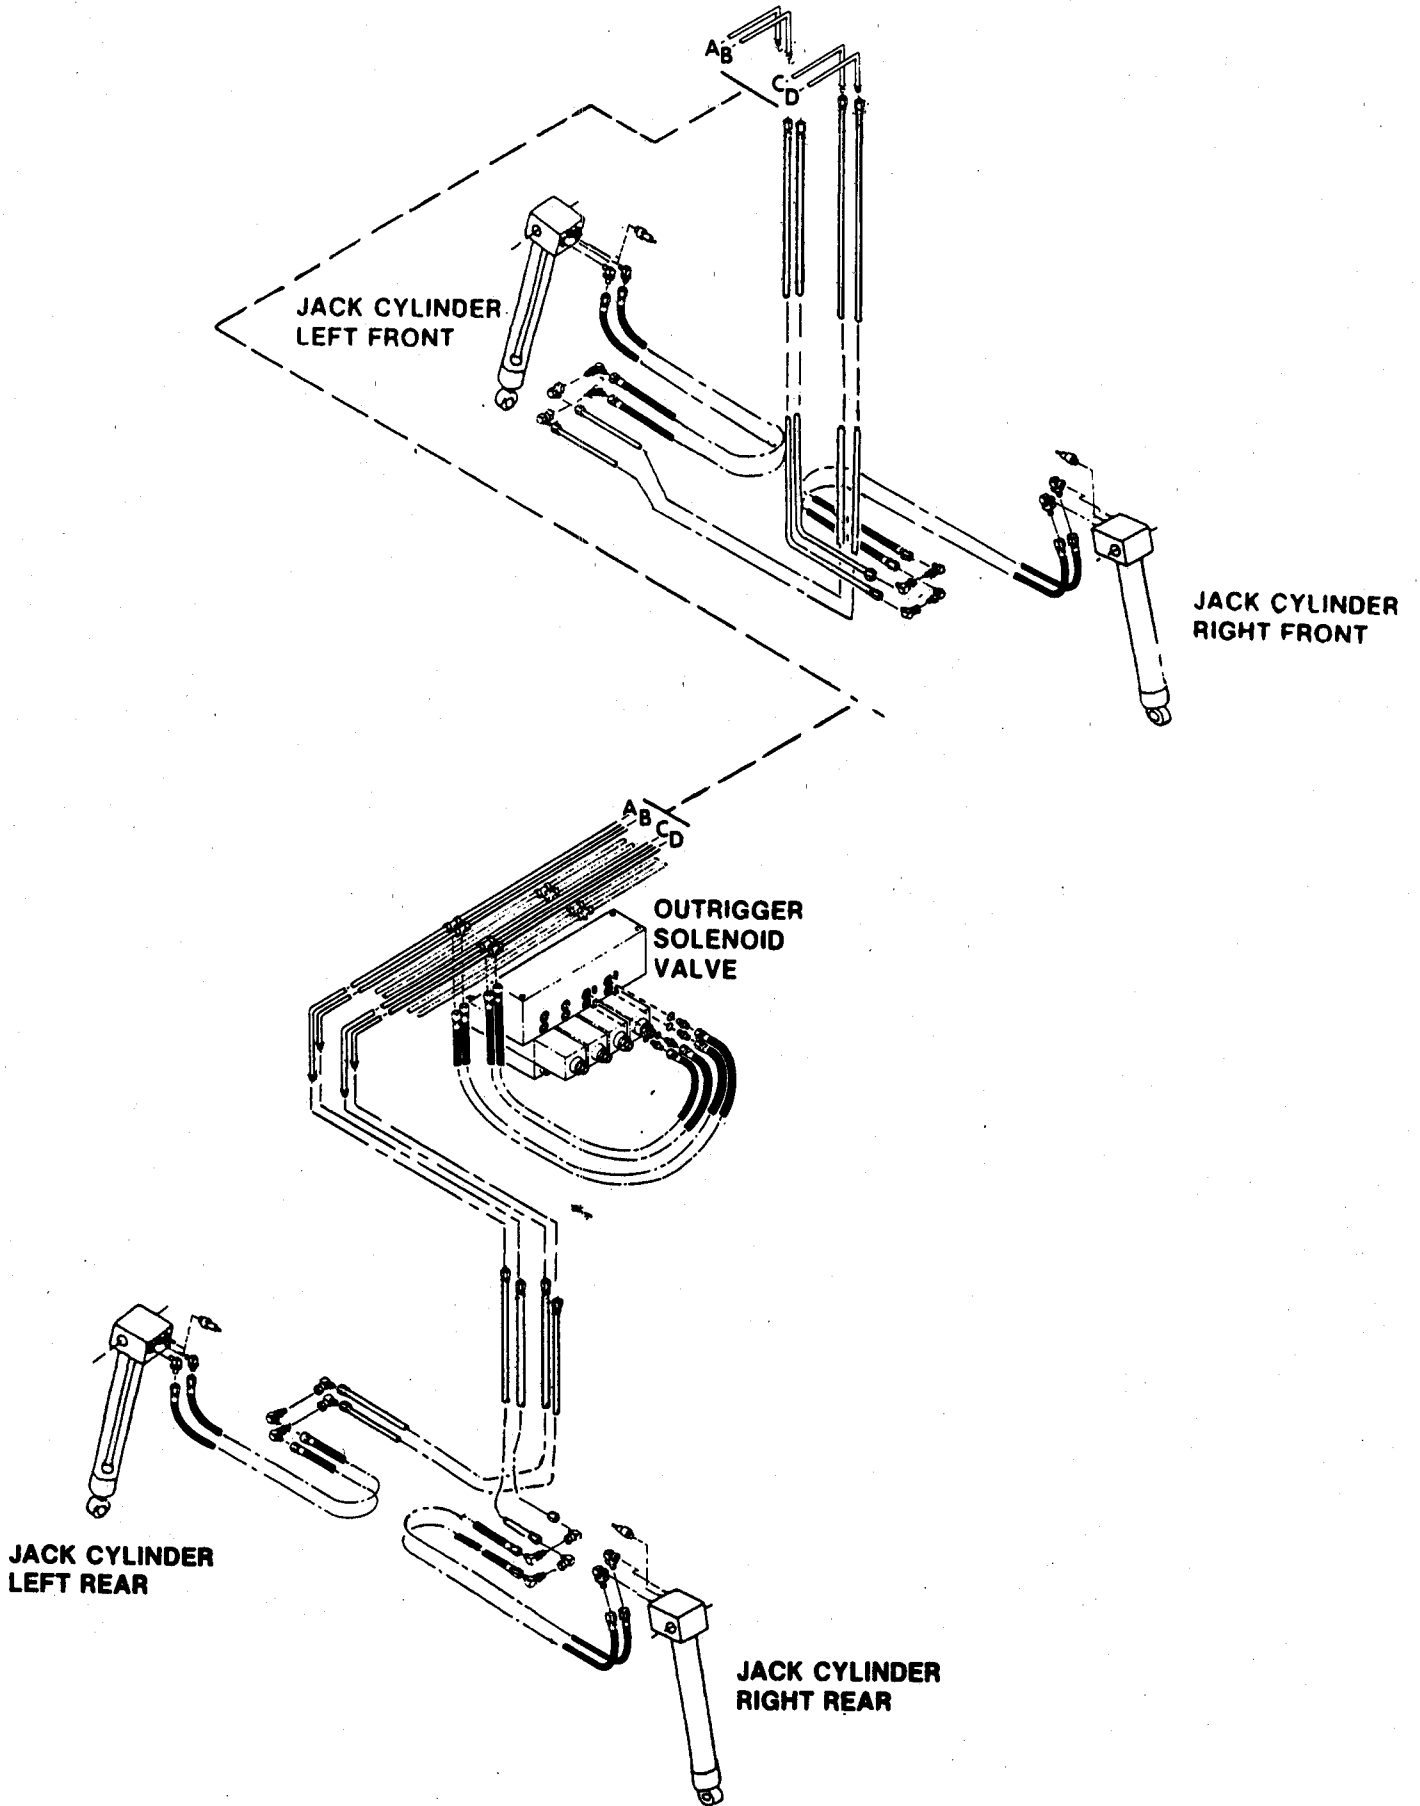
Outrigger Hydraulic Lines — Down/Up — Outrigger Valve to Jack Cylinders
